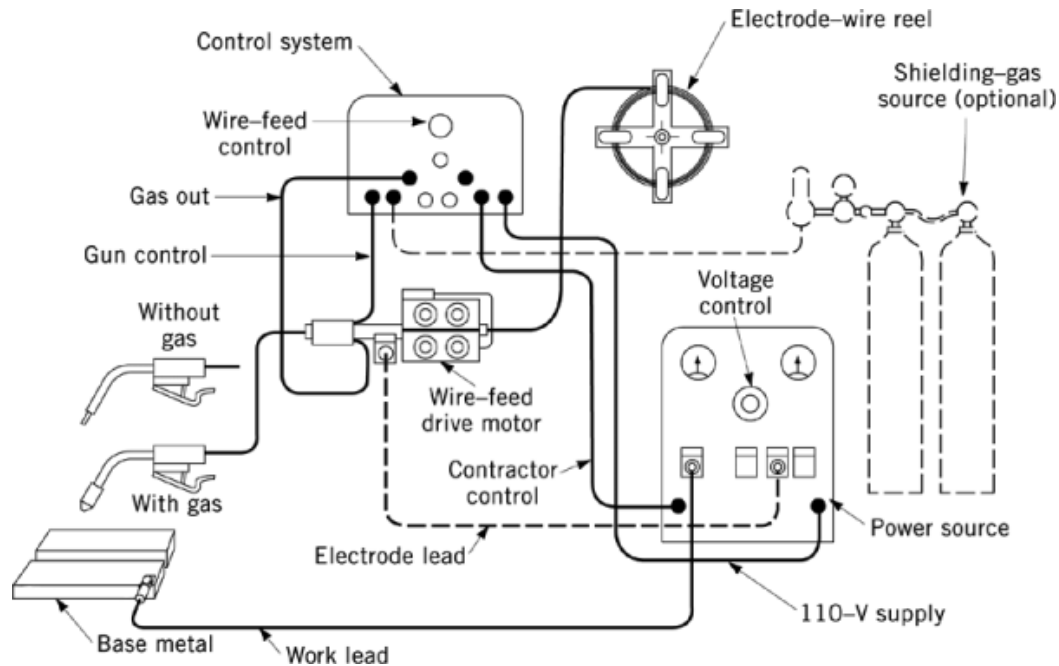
The flux-cored arc-welding (FCAW) system (2).
